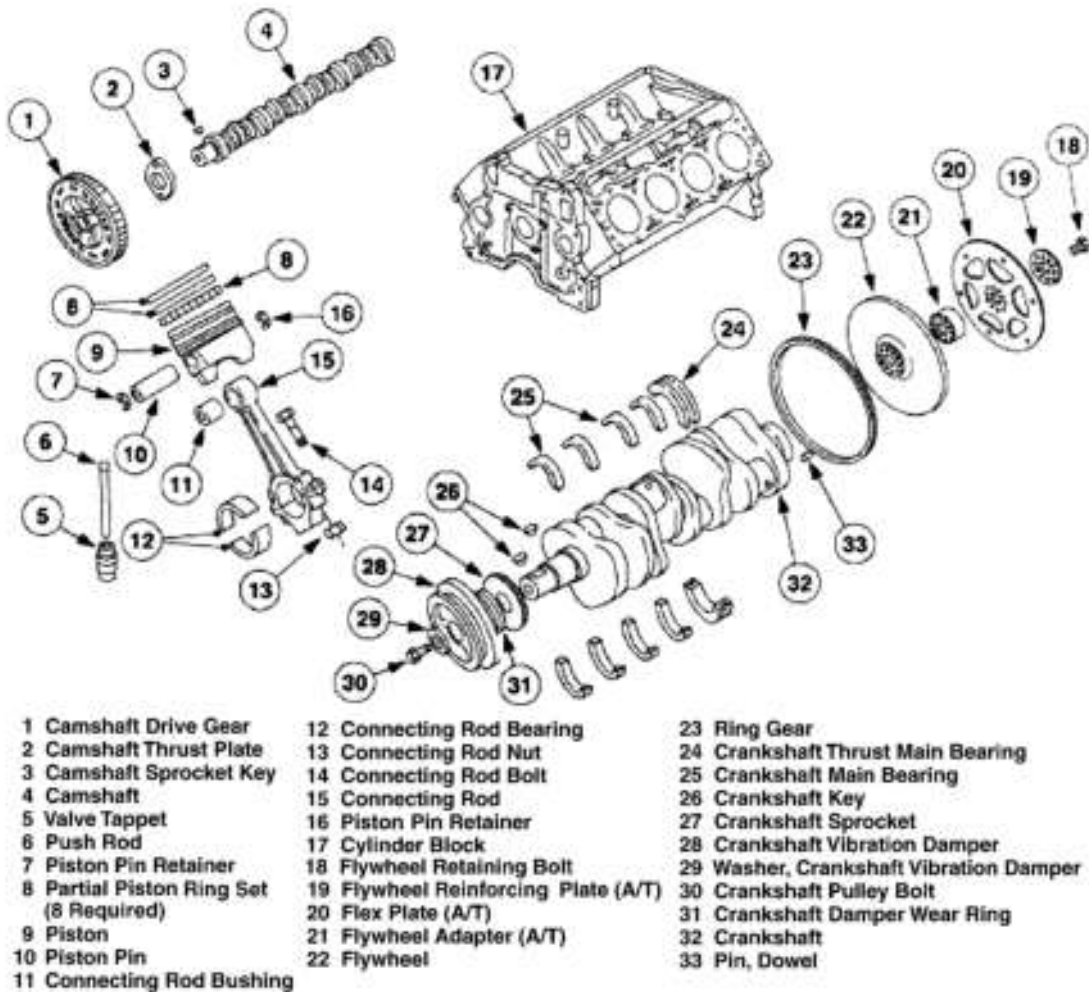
Exploded View Of Engine (1 Of 2)
